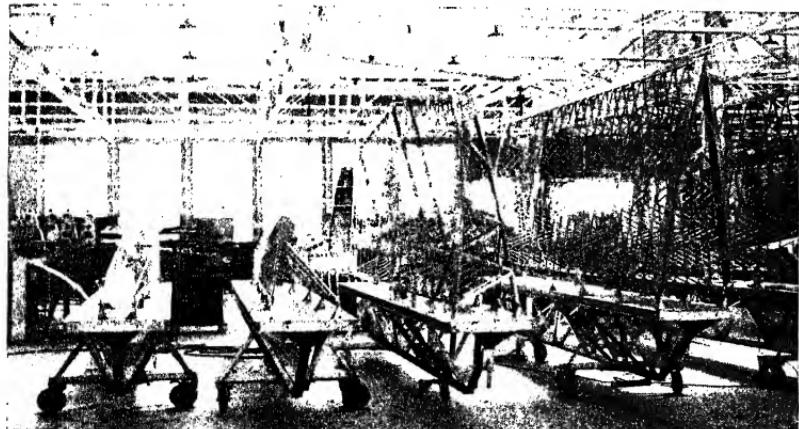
How trailing edges are handled at San Diego. (Official U.S. Navy Photograph.)
